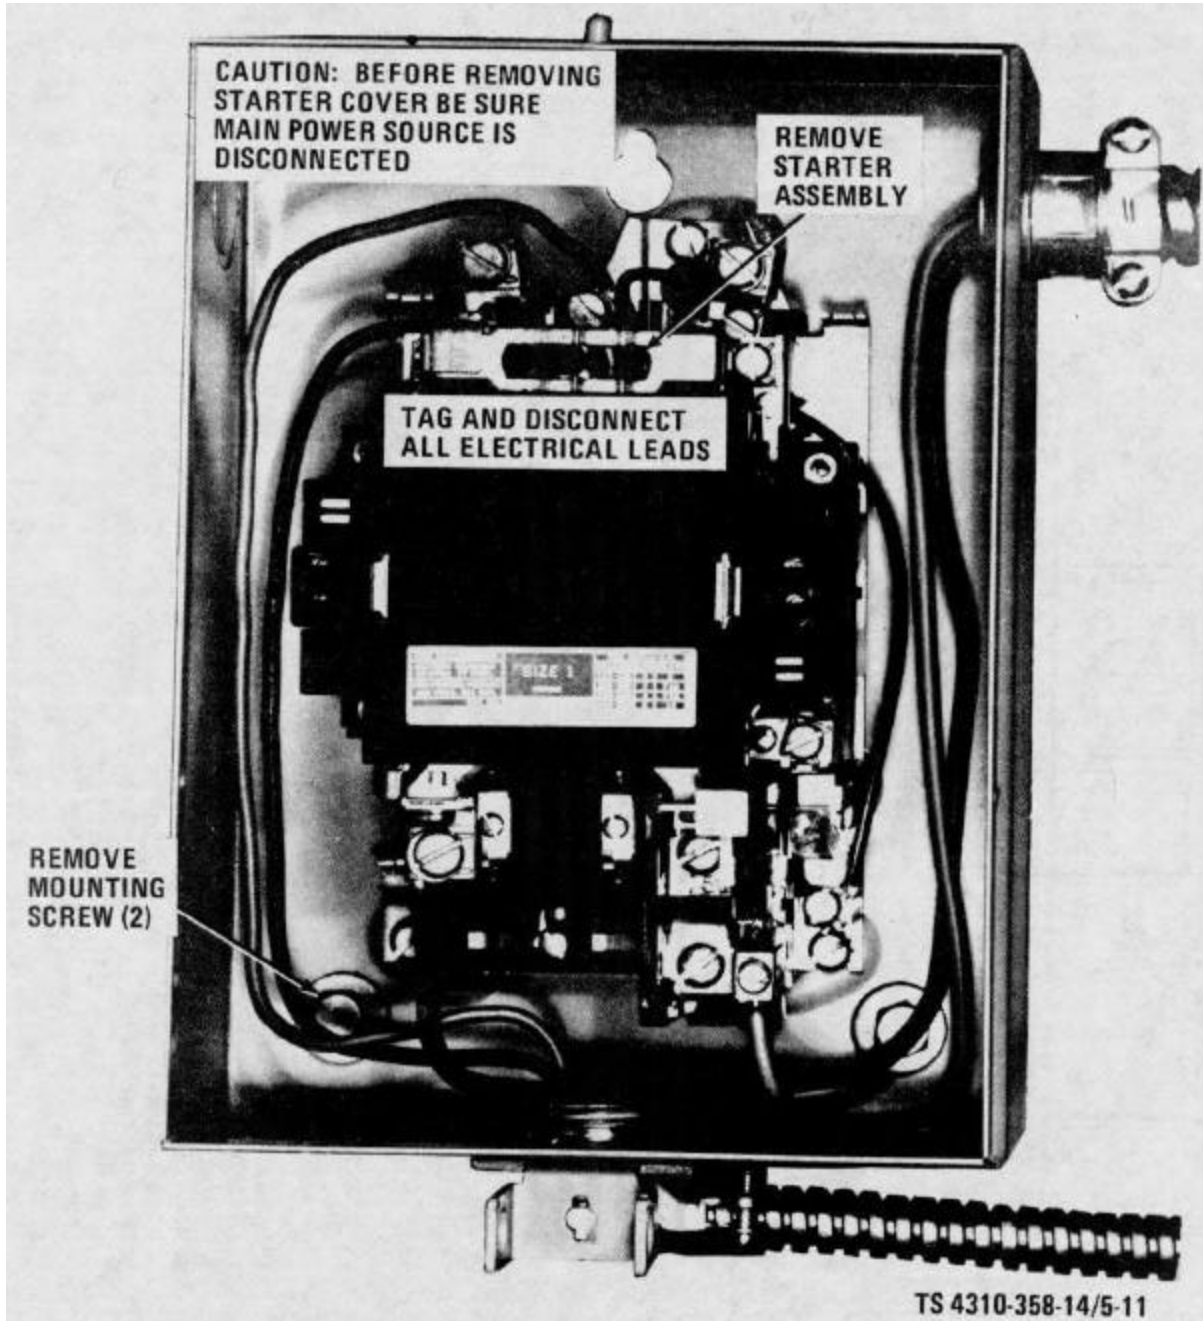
Magnetic starter, removal and installation (shown with cover removed).
